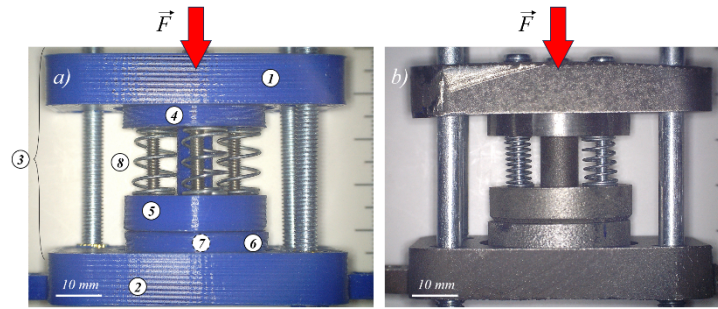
Assembled stamping tool for microdrawing, made of: polymers (a) and metals (b).
